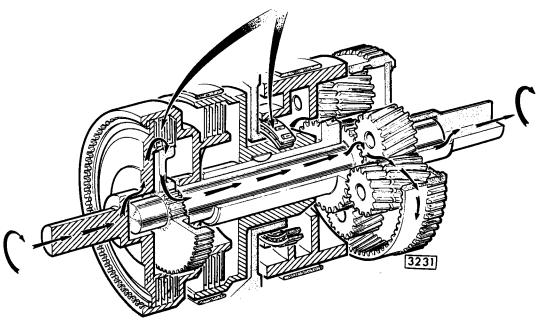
Mechanical power flow—First gear (Drive 1) selected.
